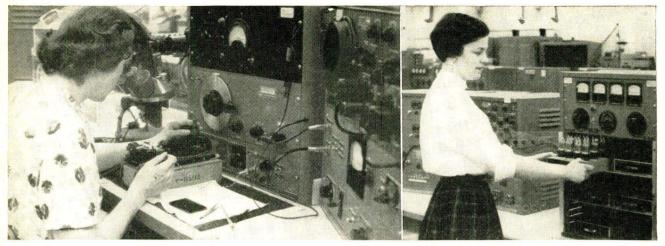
Bonding base lead (left) involves welding fine gold wire to 0.002-in. p-region. Operator probes junction with micromanipulator while checking transistor characteristics on oscilloscope. Trays of completed transistors (right) are loaded into racks for 24-hour aging
